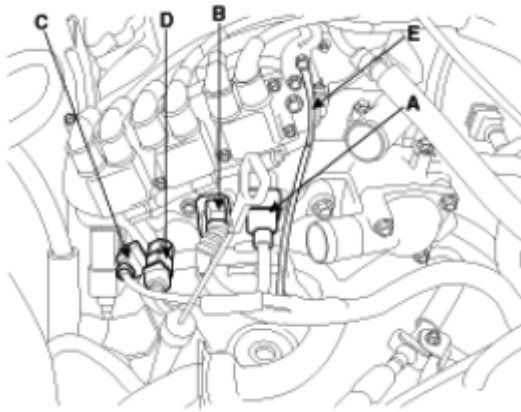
Identifying ECT Sensor, Ignition Coil And Crankshaft Position Sensor Connector
